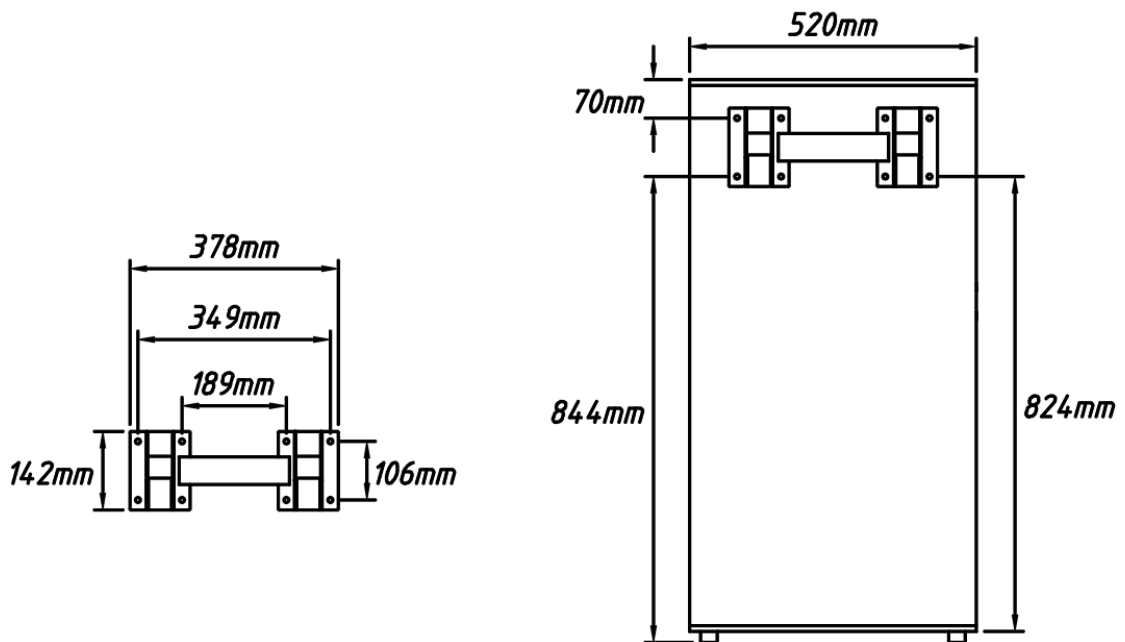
b PB2-5.1 Mounting Bracket Dimensions
